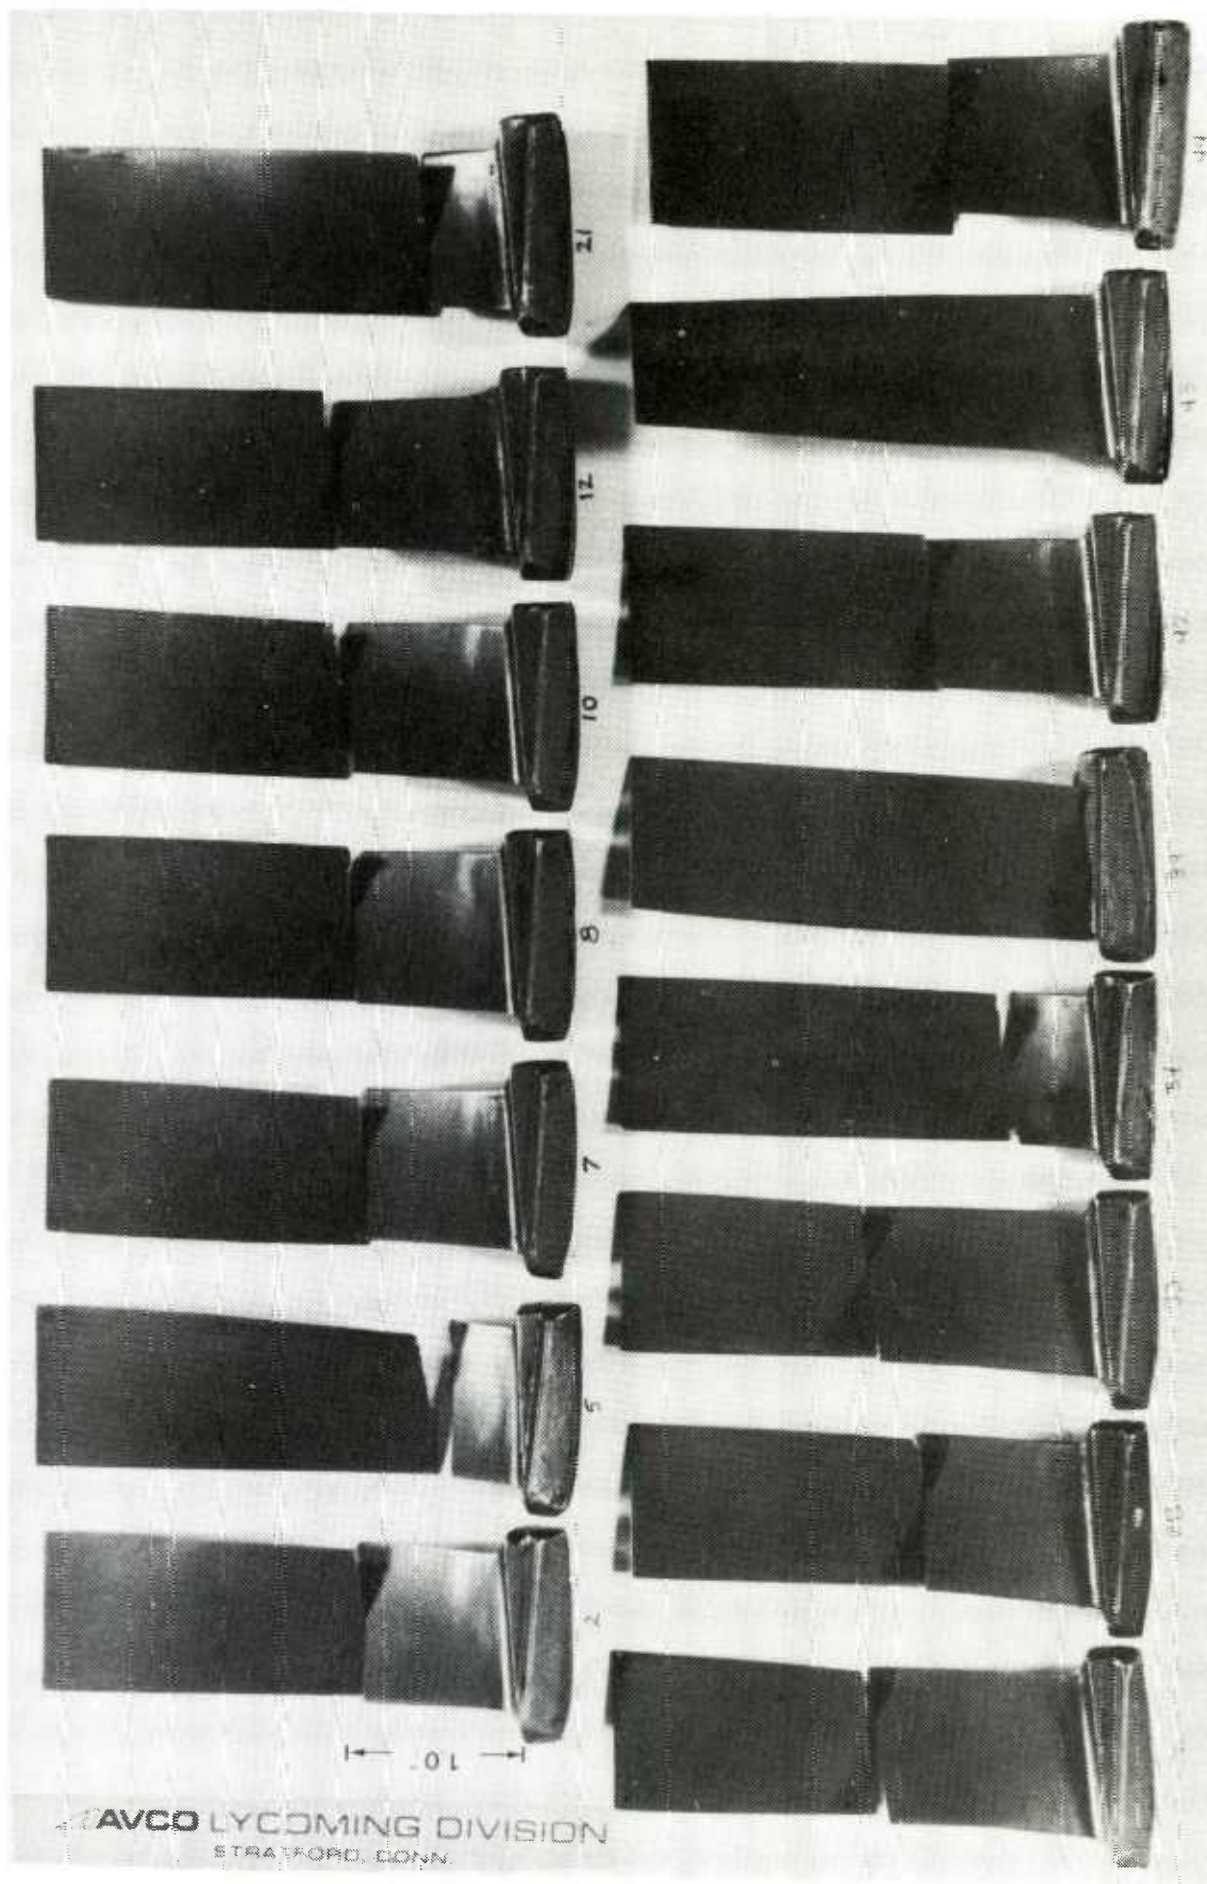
View of the Concave Side of the Solar Blades Showing the Locations of Fatigue Fracture
